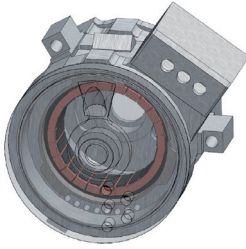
CAD model of machine PM-A as used for vibration synthesis
